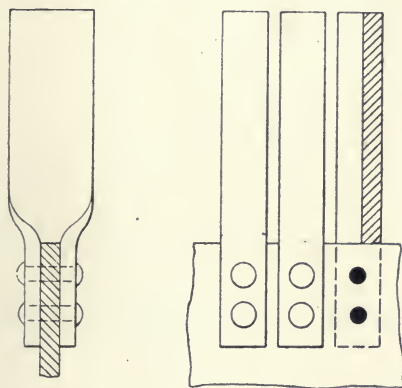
ATTACHMENT OF BLADES OF AN IMPULSE TURBINE.
